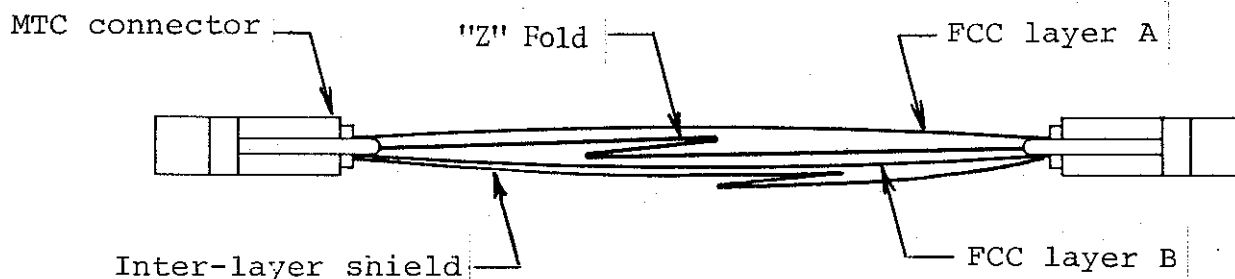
Inter-Layer Shields Folded to Match Length of FCC
